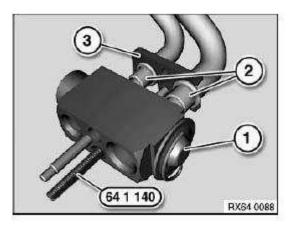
Identifying Retaining Plate With Special Tool (64 1 140) Courtesy of BMW OF NORTH AMERICA, INC.
